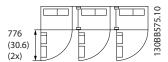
Space in front of IP21/IP54 enclosure type, frame size F11
